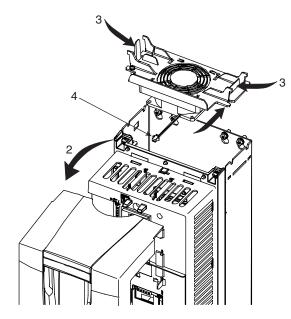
Fig. D — Main Fan Replacement (Frame Sizes R1-R4)
